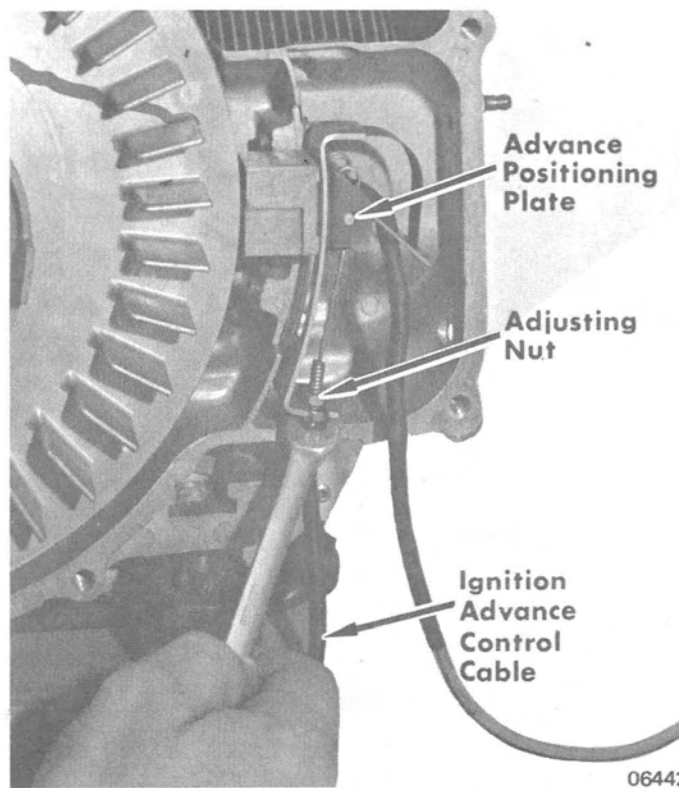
Loosening Adjusting Nuts on Ignition Advance Cable
